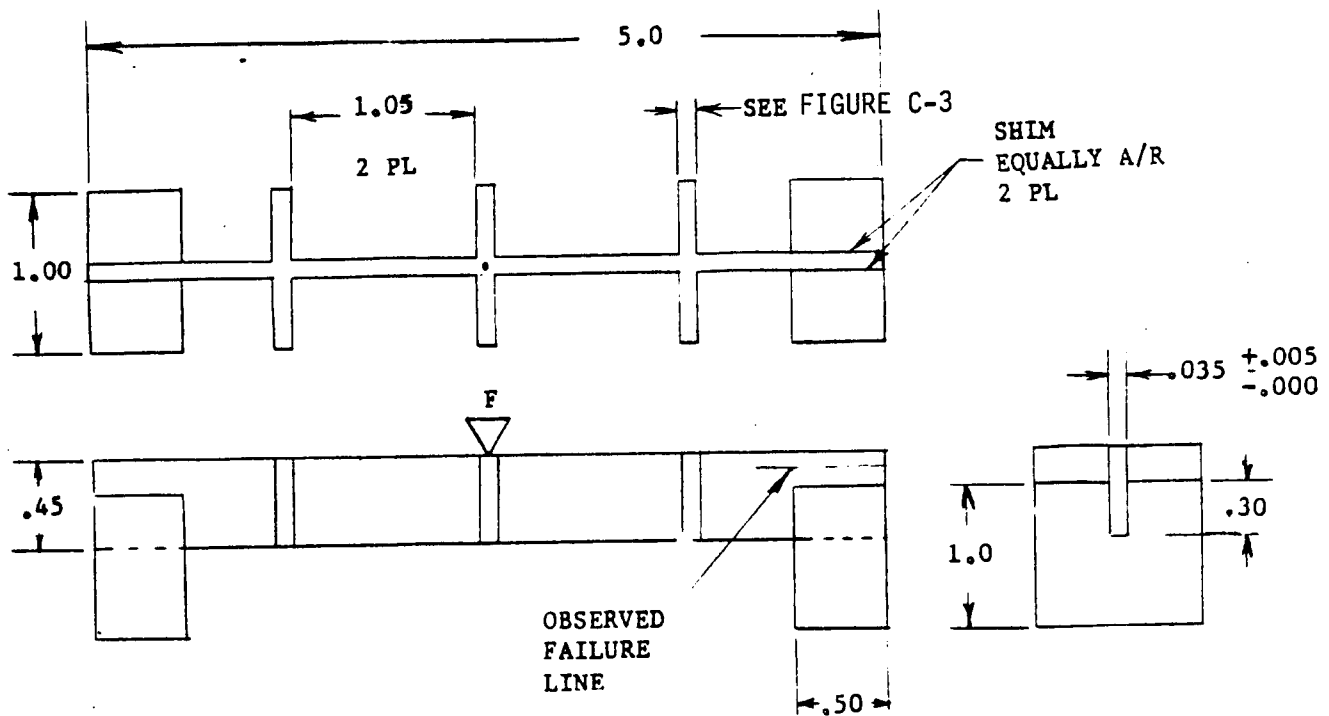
CROSS STRIP SAMPLE IN TEST FIXTURE
